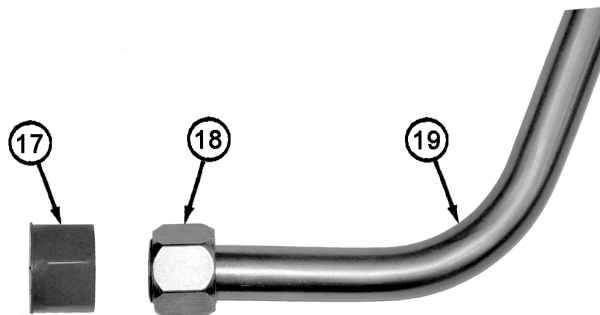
Oil Fill Tube Assembly. (X200-4A Only) (Repeated).
